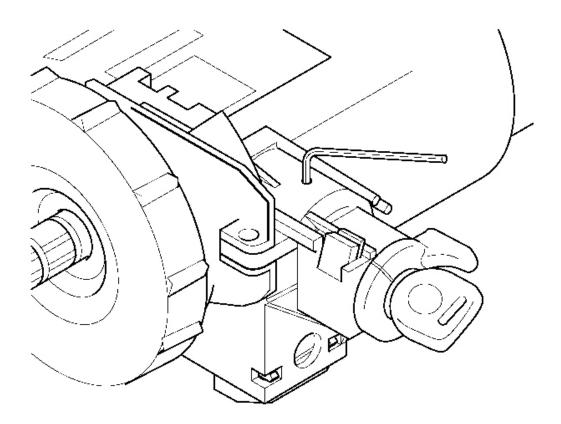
Releasing/Installing Lock Cylinder Using Allen Wrench Courtesy of GENERAL MOTORS CORP.
